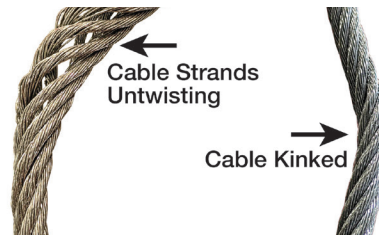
Cable Strands Untwisting and Cable Kinked
